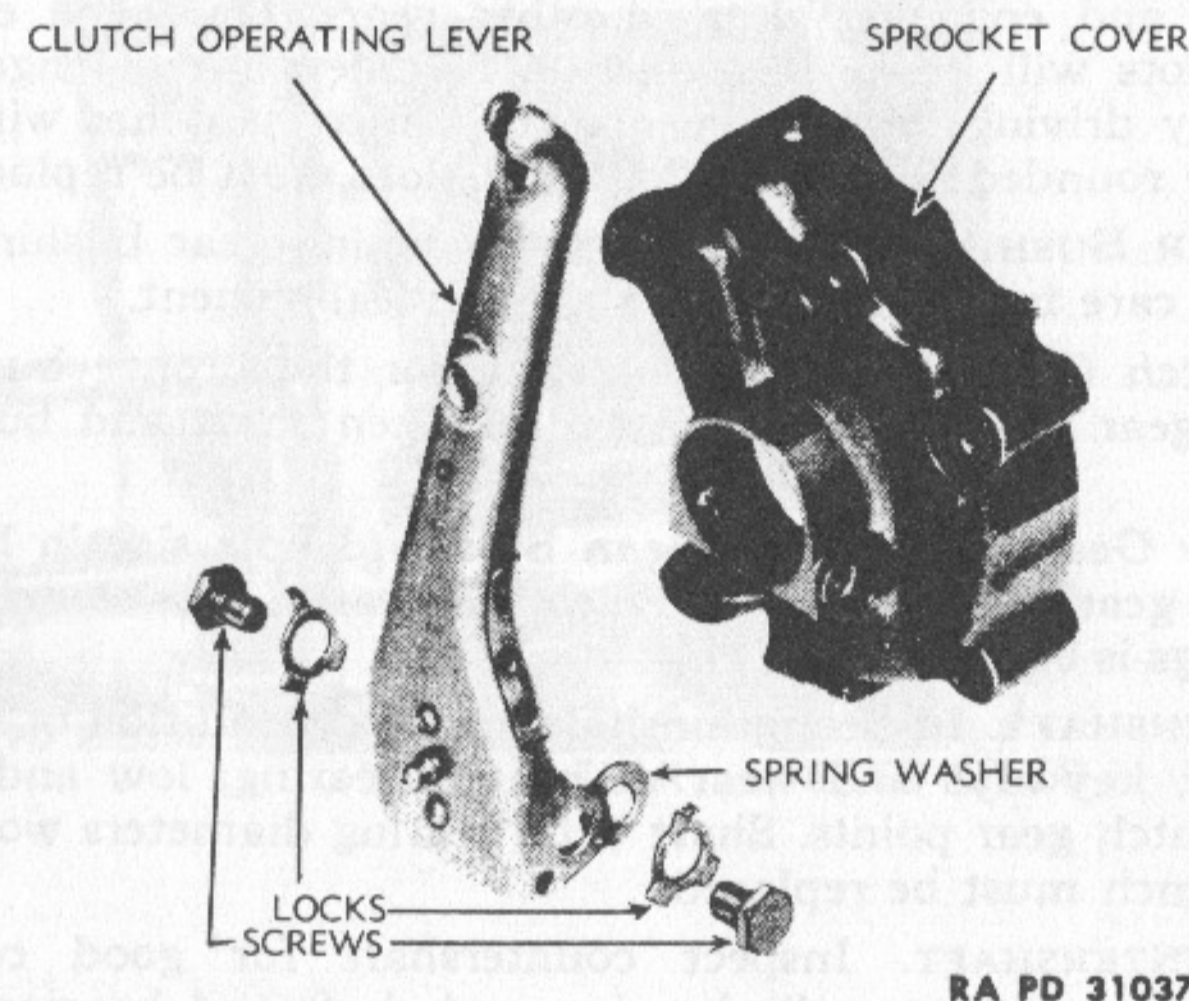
Sprocket Cover and Clutch Lever, Disassembled
